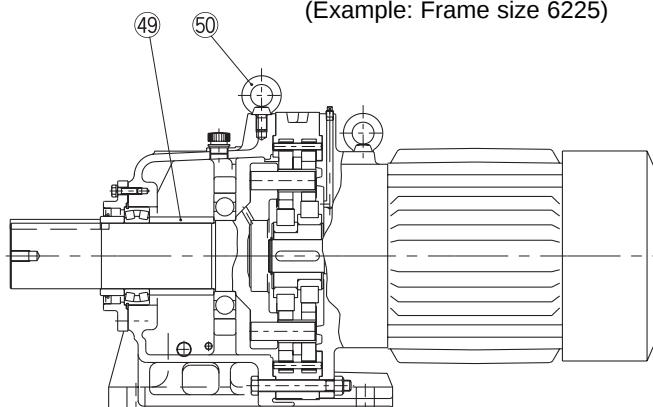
Type CNHM (Horizontal, Gearmotor) Single reduction
